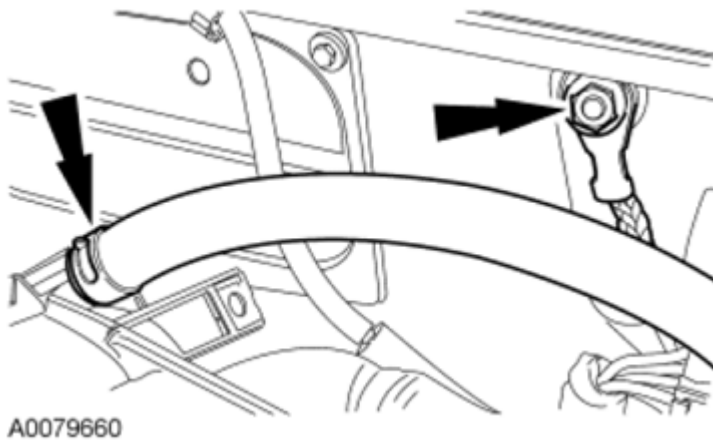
Locating Brake Booster Vacuum Hose And Engine Ground Strap
